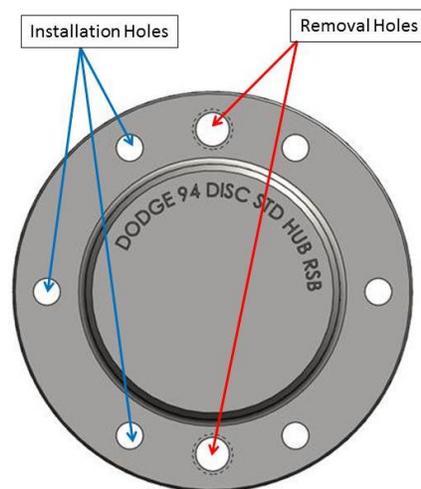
Removal Hole Locations for Baldor•Dodge Standard Disc Hub.
